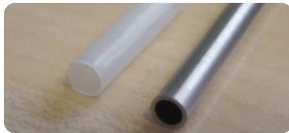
PLA tube (left) and Dip Coating 316 SS mandrel
